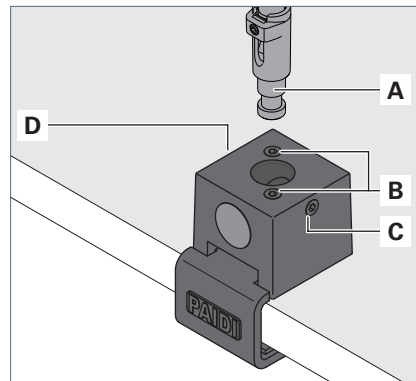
Mounting the luminaire to a horizontal mounting surface.
